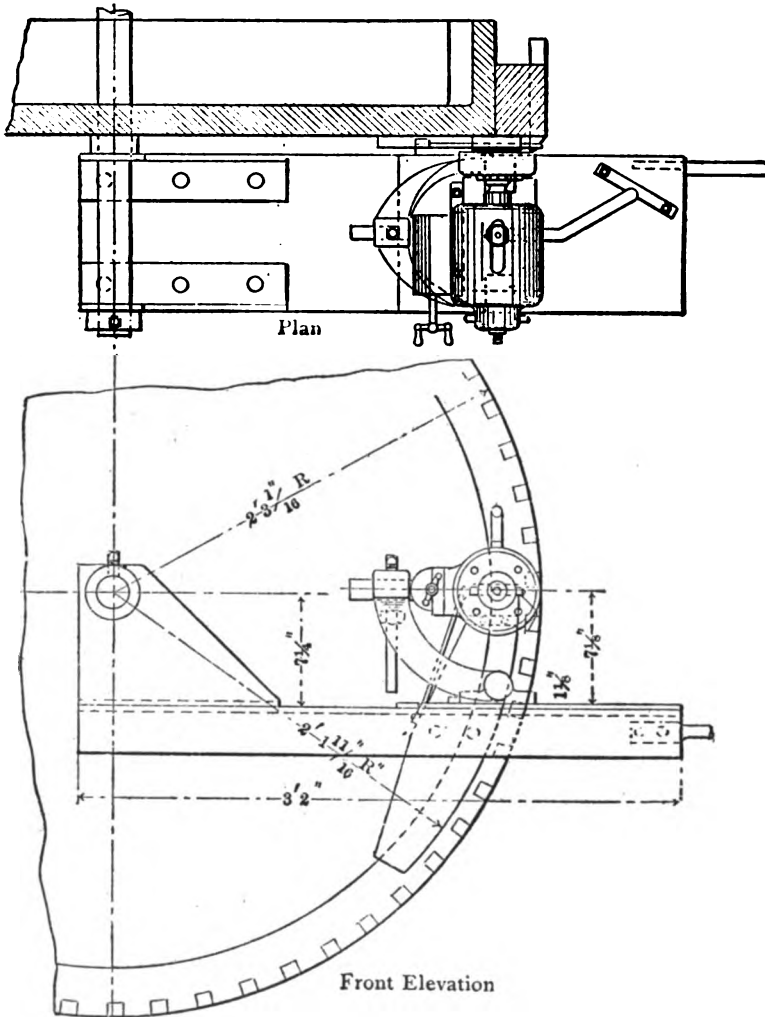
Fixture for Grinding Rotary Planer Cutters.
